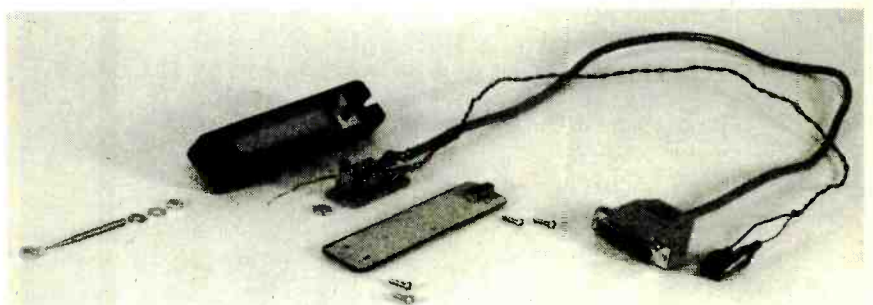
The author's prototype uses a stacked-board arrangement for the circuit board; a single board will fit in the space just as well.
